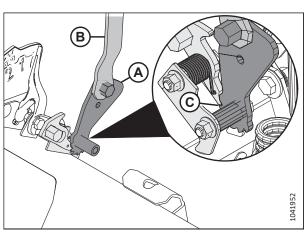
Multi-Tool Engaged with Left Float Setting Assembly
